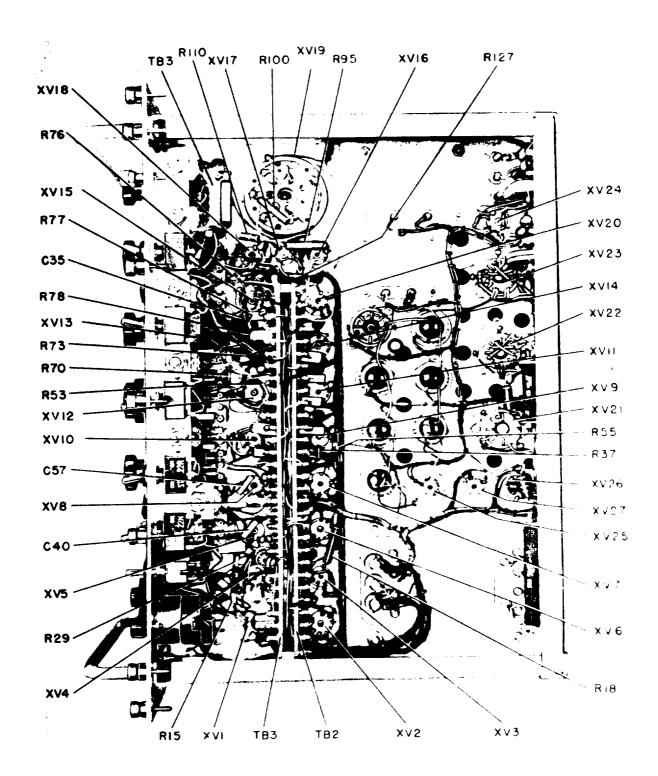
Chassis, Bottom View TS-592A/UPM-15
